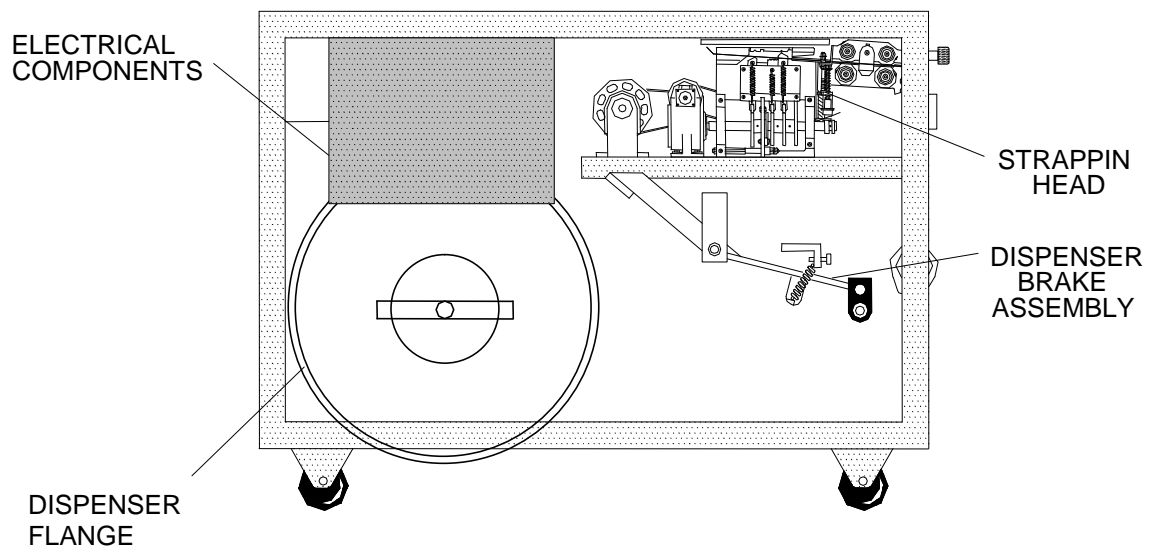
MAJOR COMPONENTS, FRONT VIEW
